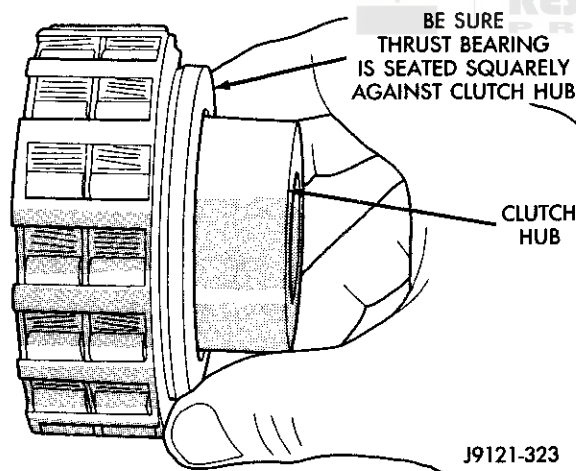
Installing Overrunning Clutch Thrust Bearing
